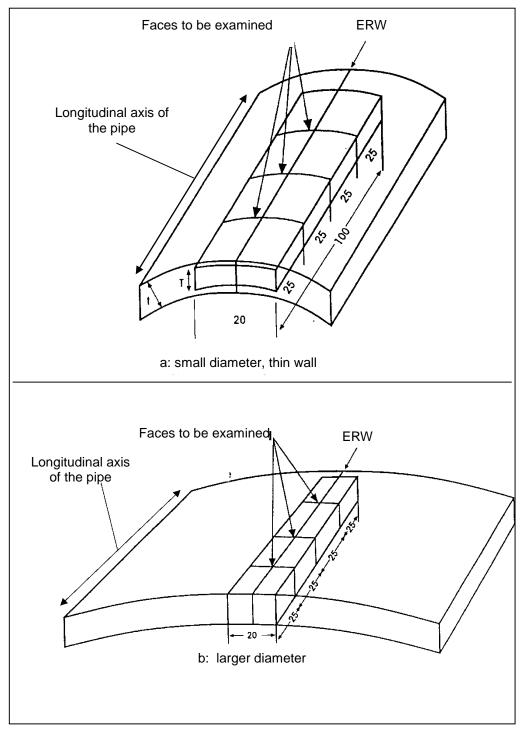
Weld Area of ERW Pipe (All Dimensions in mm [1 in = 25.4 mm])
